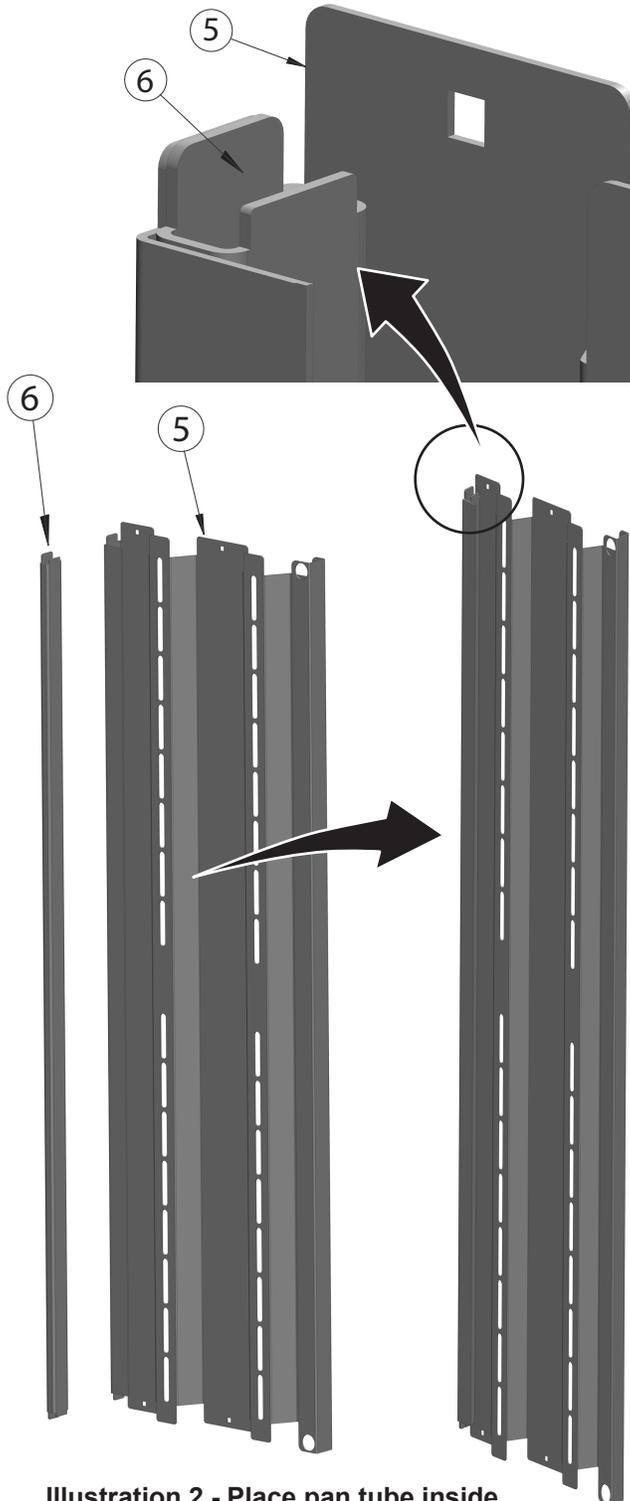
Place pan tube inside front edge of rear formed pan.
